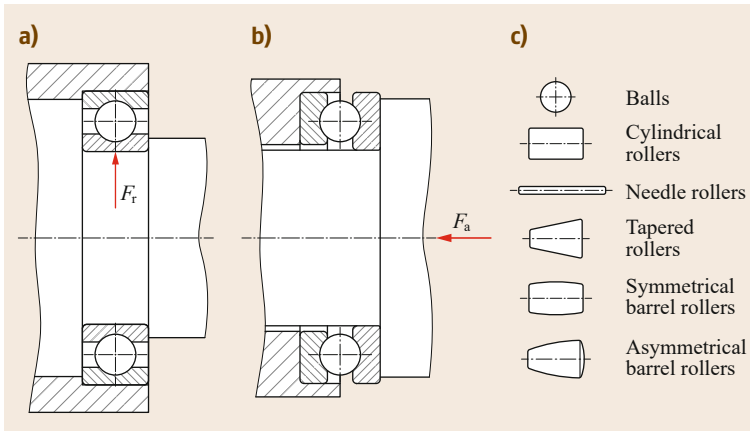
c Radial and thrust bearings (selection with installation examples). (a) Radial deep-groove ball bearings; (b) deep-groove thrust ball bearings, and (c) rolling element shapes
